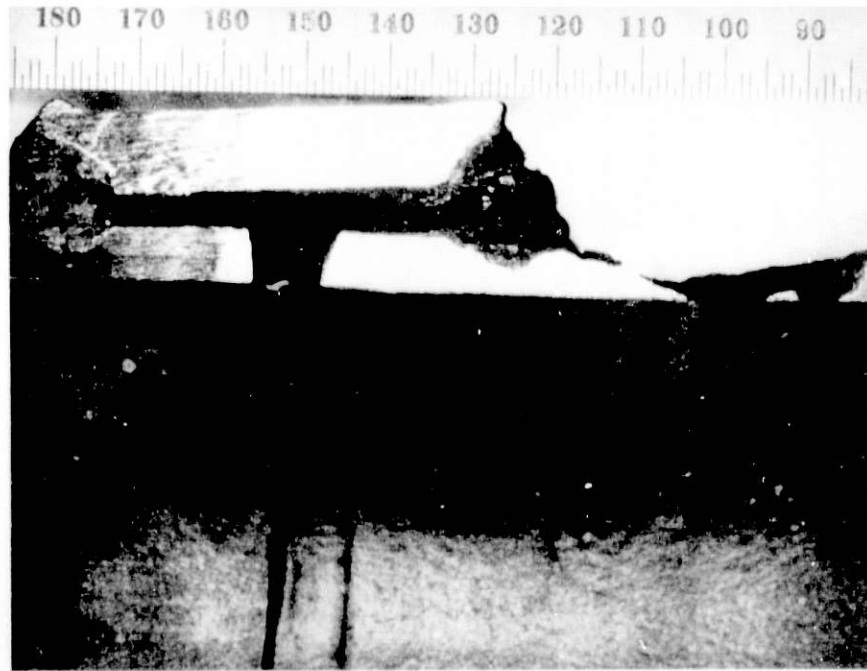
Macroscopic Appearance of Failed Weld Coupling from HYGAS Internal Solids Transfer Line. ANL Neg. No. 306-80-208.
